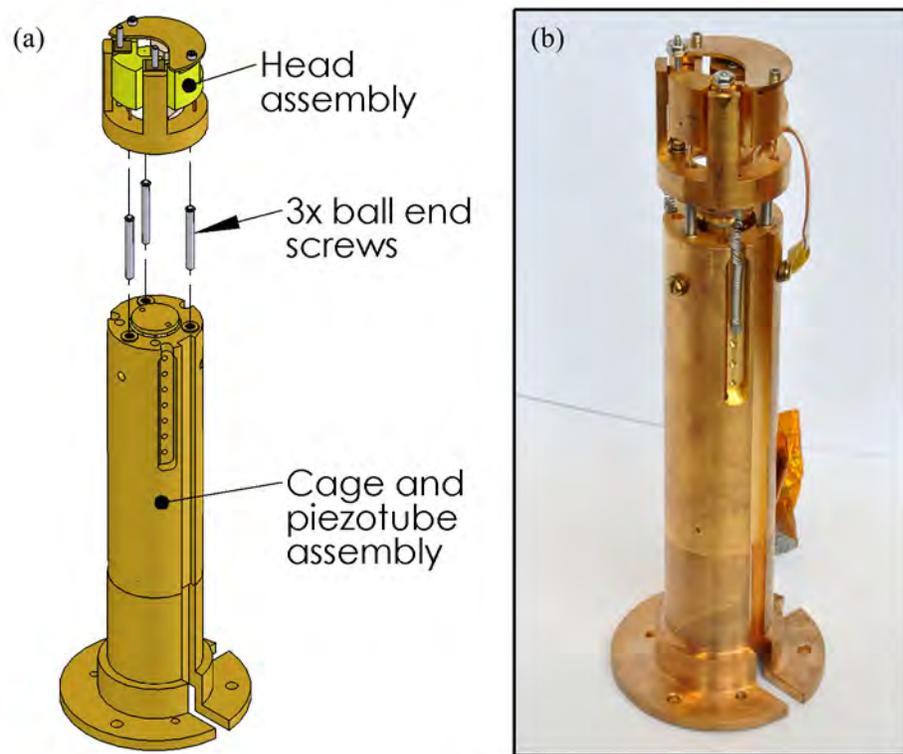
(a) Isometric projection of the microscope head and cage showing the position of three M2.5-0.2 ball end set screws. Each screw fits into a threaded bushing epoxied into the cage. The ball of each screw sits in the V-shaped grooves in the bottom of the lower head to ensure that the head is rigidly held over the cage. (b) Photo of the assembled cage and head. Three springs (one visible) hold the head firmly against the ball end screws of the cage.
